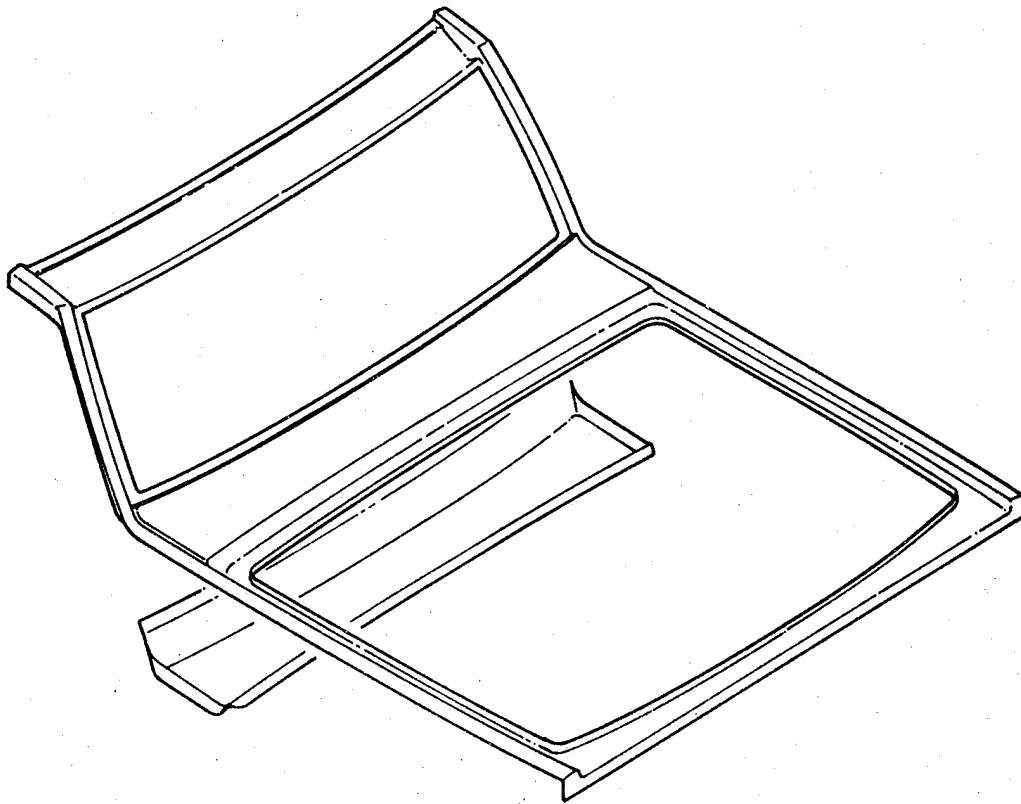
SECTION: SIDE TO FLOOR, REINFORCED PLASTIC
